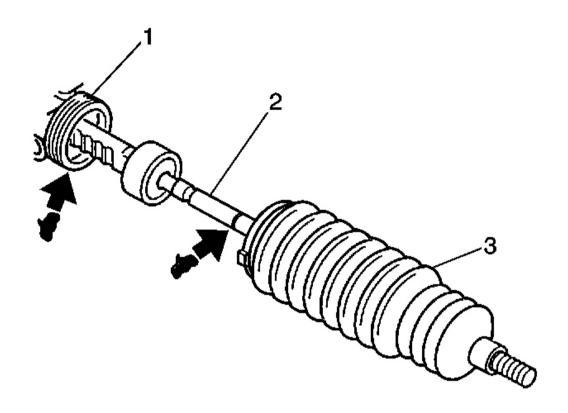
Inner Rod, Gear Assembly & Boot Courtesy of GENERAL MOTORS CORP.
